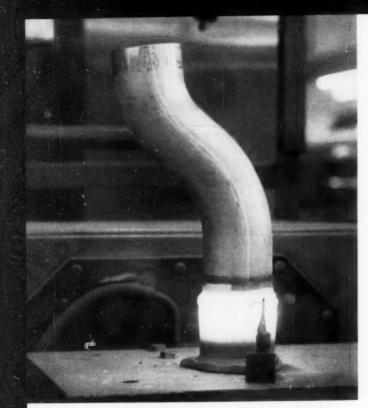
19-9 DL Stainless Manifold Parts Being Brazed With a High-Nickel Brazing Alloy. Special coating allows brazing in air. Induction coil is on inside
